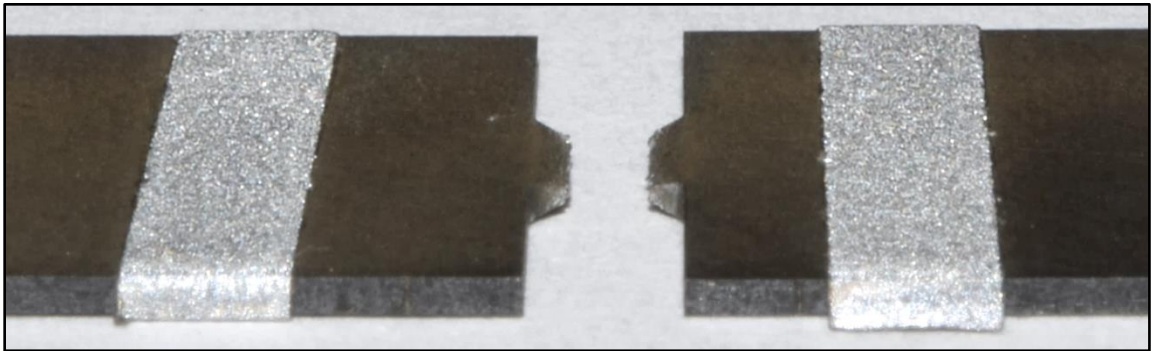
Small Notched Flat Specimen: Macro View of Typical Failure Zone
